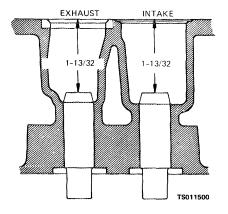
Valve guide installation dimensions. oversize to provide a 0.003 to 0.005 inch (0.0075 to 0. 0125 cm) press fit. Counterbore deeply enough so that the boring tool will clean up the bottom of the bore to ensure proper heat conduction from the valve insert. Chill the valve seats in dry ice for 20 minutes. Install the valve seat in place with a piloted driver, by using an arbor press or by applying light blows with a hammer until the valve seat is resting against the bottom of the bore. Roll or peen the valve seat into place.
